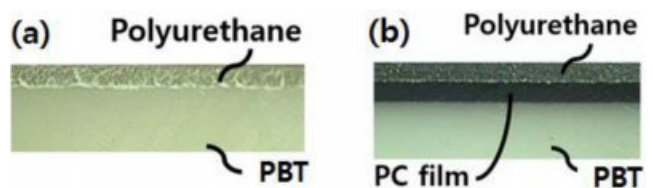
Layers of cross-section for (a) in-mold coating without film; (b) in-mold coating with film insert.
